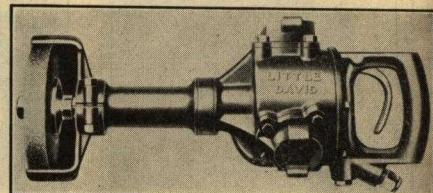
“Little David” air grinder, Ingersoll-Rand Co., N. Y.
